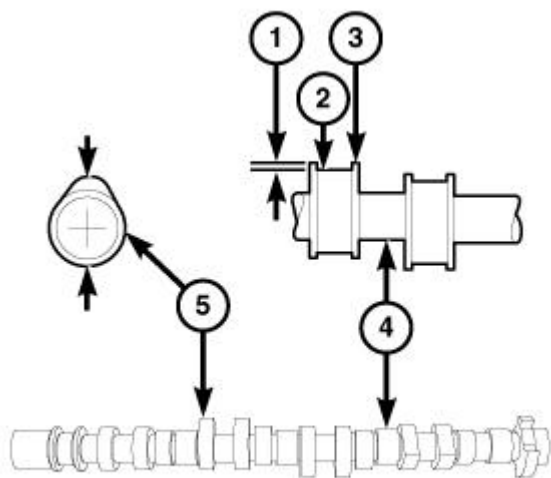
Inspecting Camshaft Wear Areas
